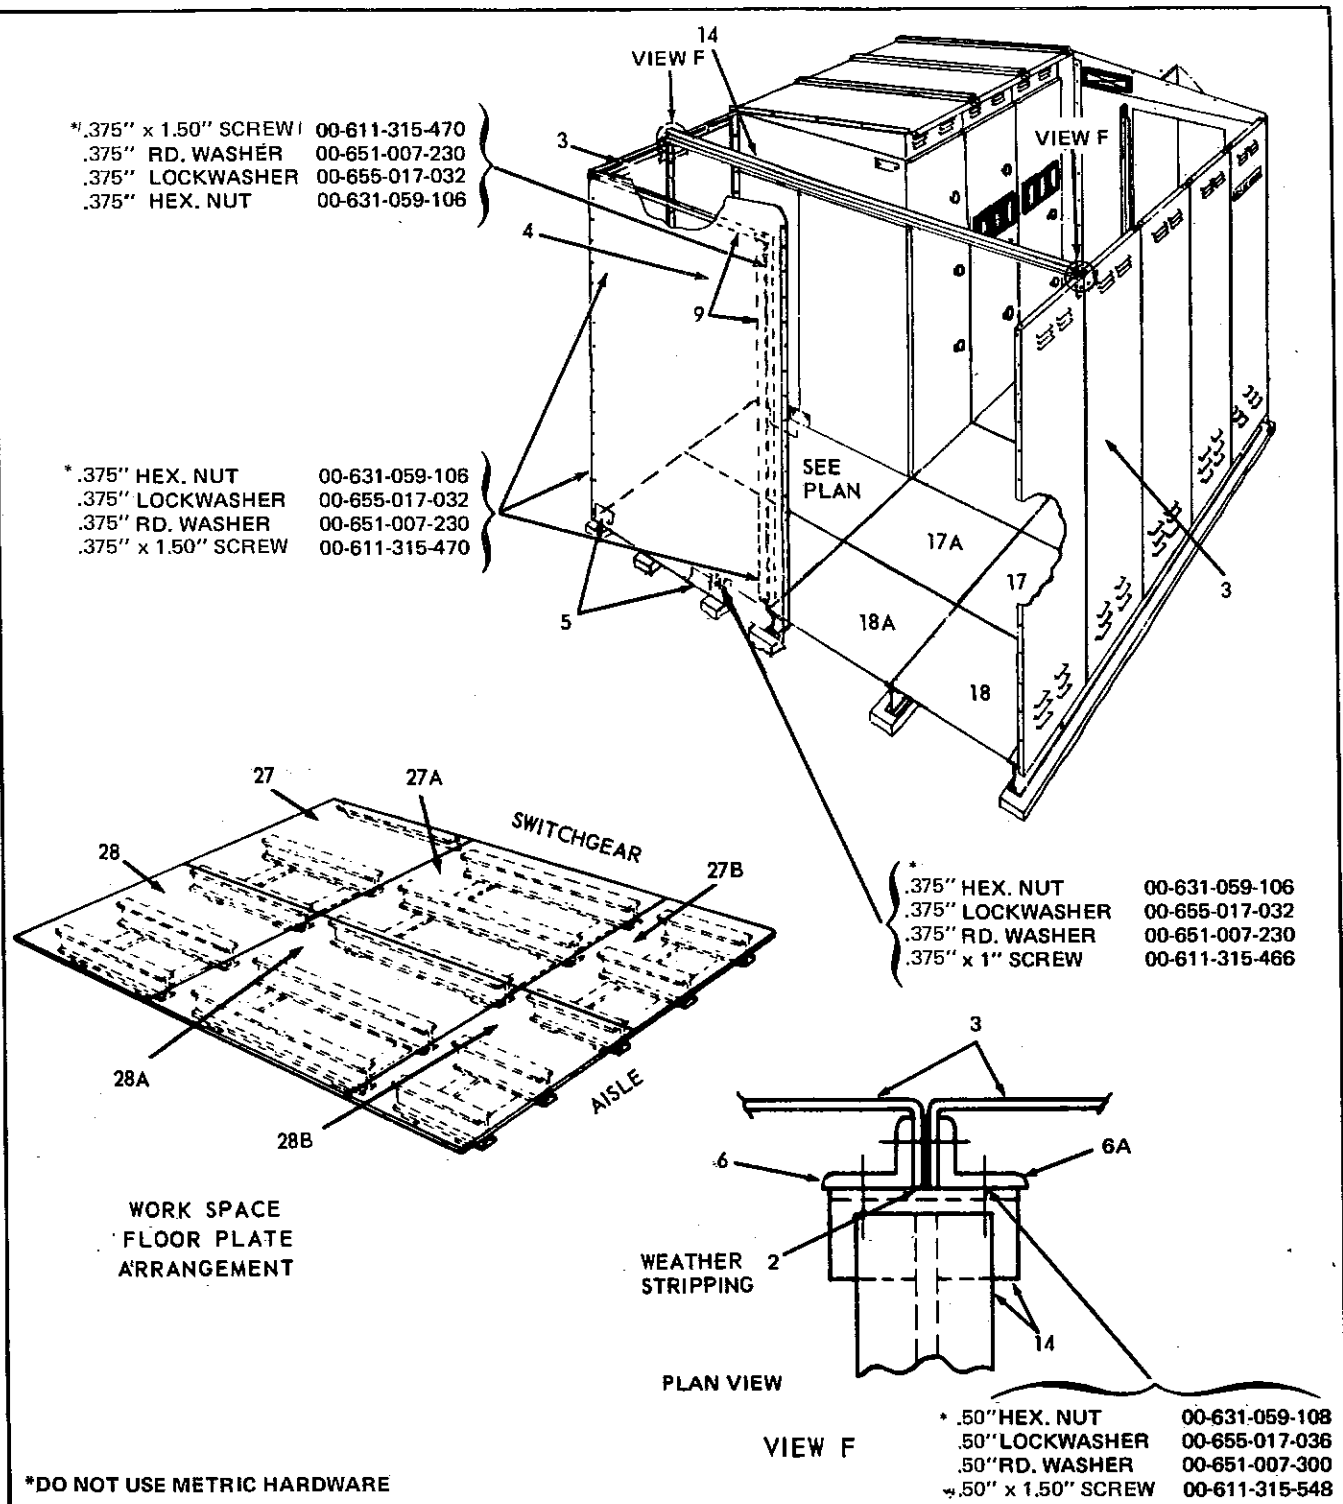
Floor Plate Installation (15 kV) - Single Aisle with Work Space
